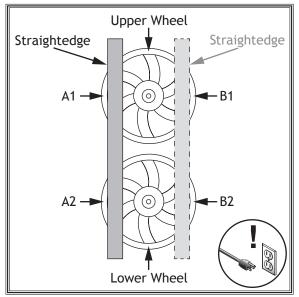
Example of using a straightedge to check lateral wheel alignment.
